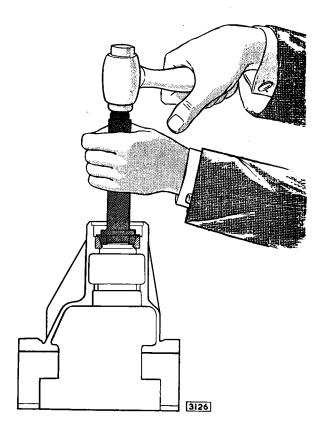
Replacing a pinion outer bearing outer race using Churchill Tool Part No. 550 with adaptor Part No. SL.550—4.
